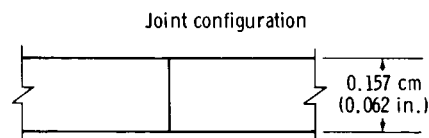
Configuration of 6Al-4V titanium (STA) pressure-weld specimen.
